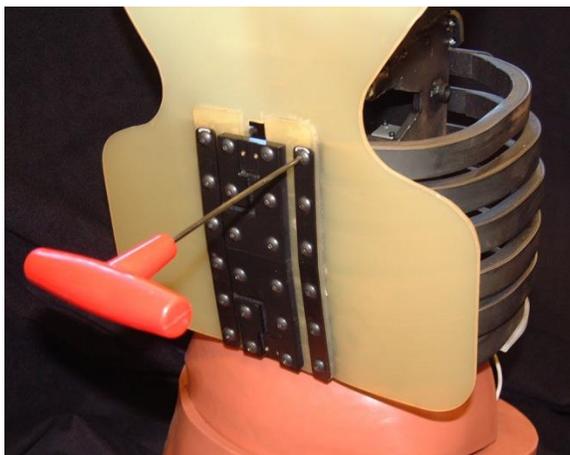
Components of joint between spine box and shoulder support assembly
